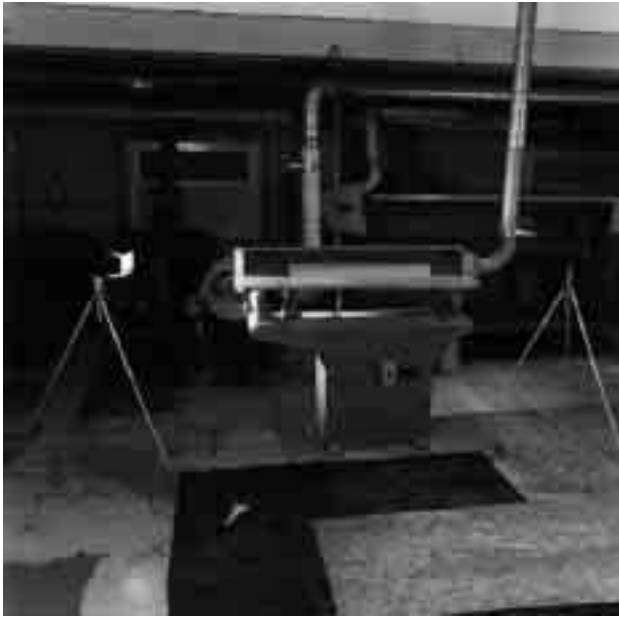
The arrangement of the lamp, sanding machine and camera for dust lamp photography, set up on a vertical belt wood sanding machine
